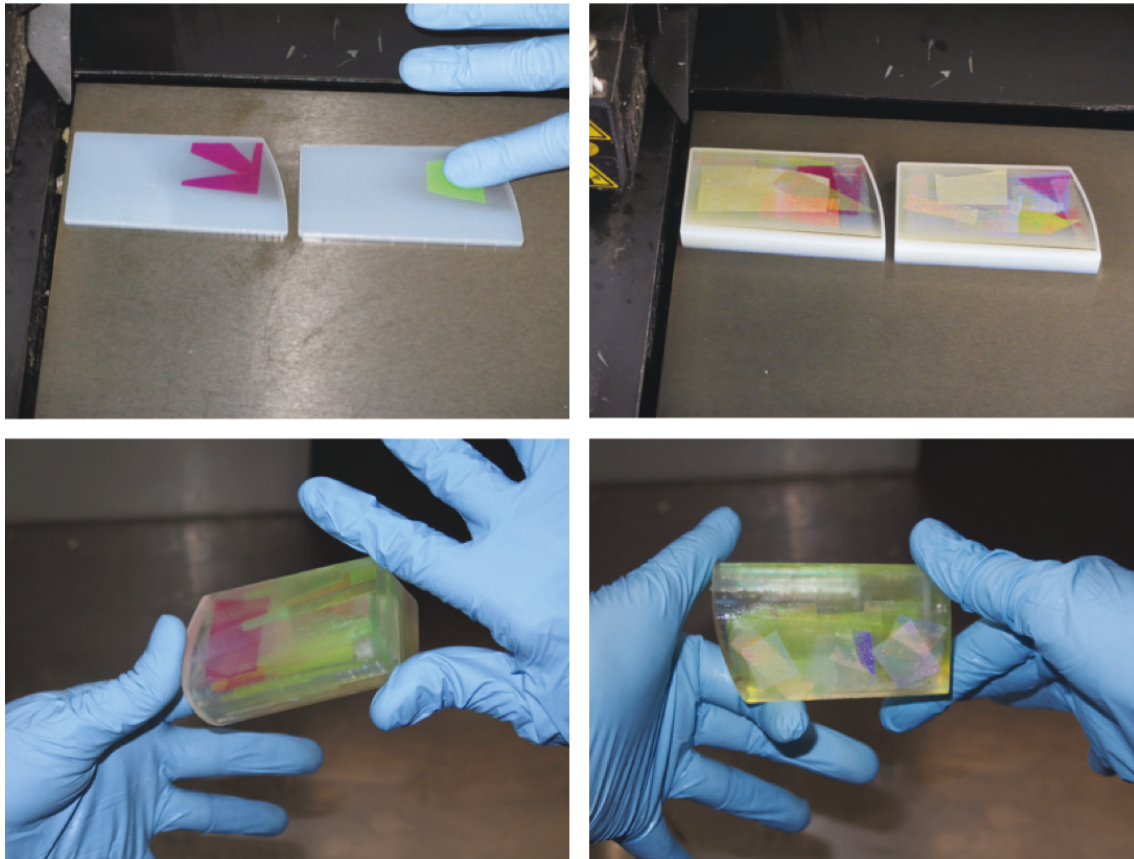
Stages of printing with Mylar in-lays. Top left: adding Mylar. Top Right: building layers of Mylar every 10 print slices. Bottom left and right: washed 3D print showing Mylar in-lays.
